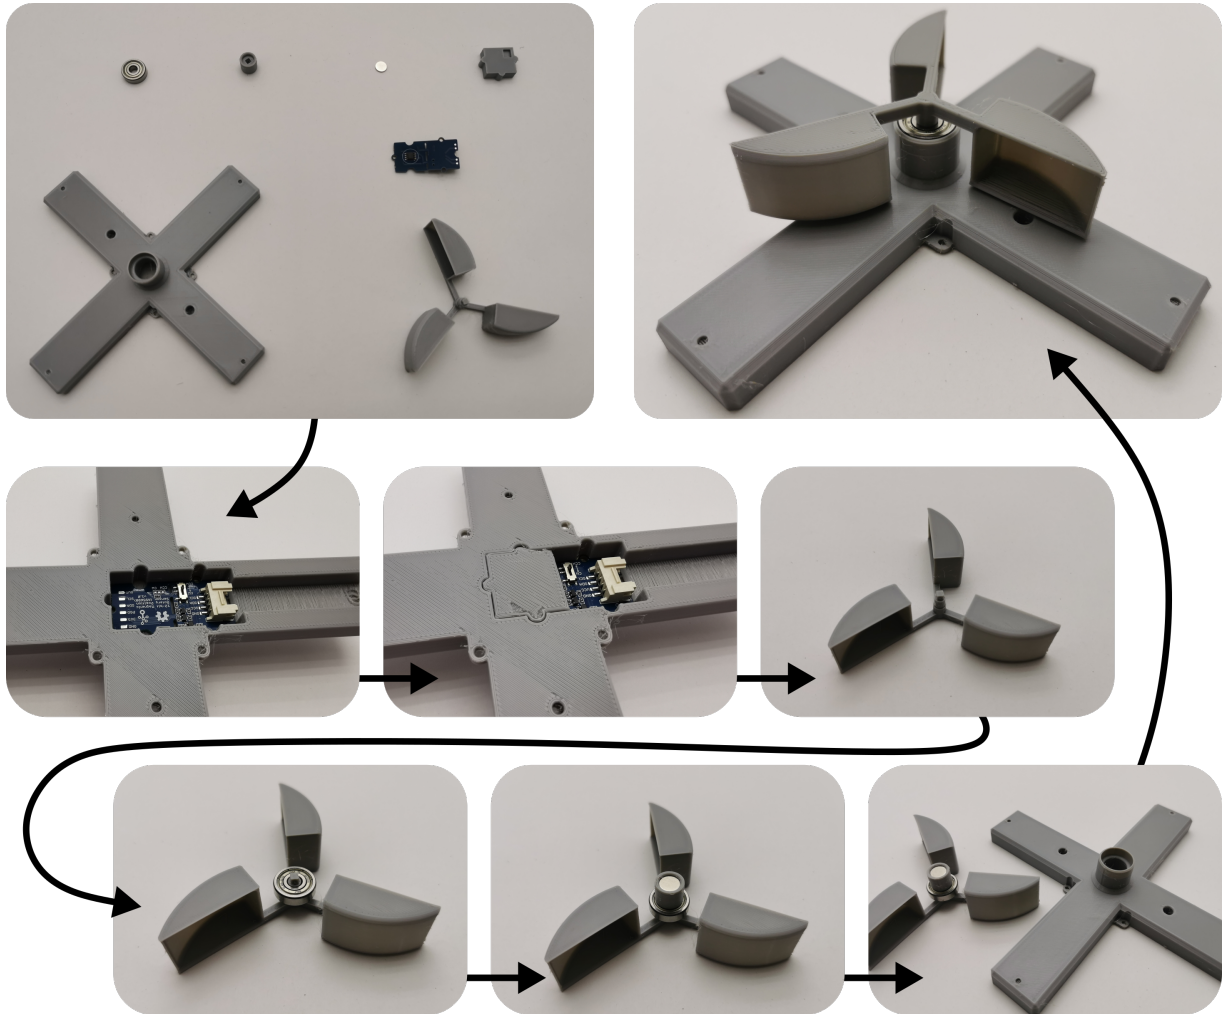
Anemometer construction. Parts are shown in the upper left, going clockwise, we have the bearing, magnet housing, magnet, retaining plate, encoder package, anemometer, and finally the housing. The encoder package is placed in the housing and the retaining plate is placed behind to hold it in place. The anemometer design incorporates an axle over which a bearing is fitted. The bearing is then held in place by the magnet housing. This whole assembly then sits inside the bearing mount on the housing which holds the magnet within range of the encoder. Vane construction is identical except for the mechanical part attached to the magnet (a vane instead of an anemometer).
